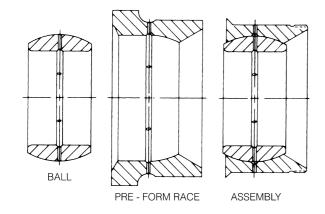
demonstrates an alternative swaging method used when the bearing geometry precludes or renders impractical the double swaging method shown in figure 7. The pre-form design is used when the bearing outer race is not symmetrical about the spherical centerline due to a flange or a wide overhang on one side or a combination of both. In such case, the problem side of the race is pre-formed by machining and grinding and the opposite side only is swaged.
